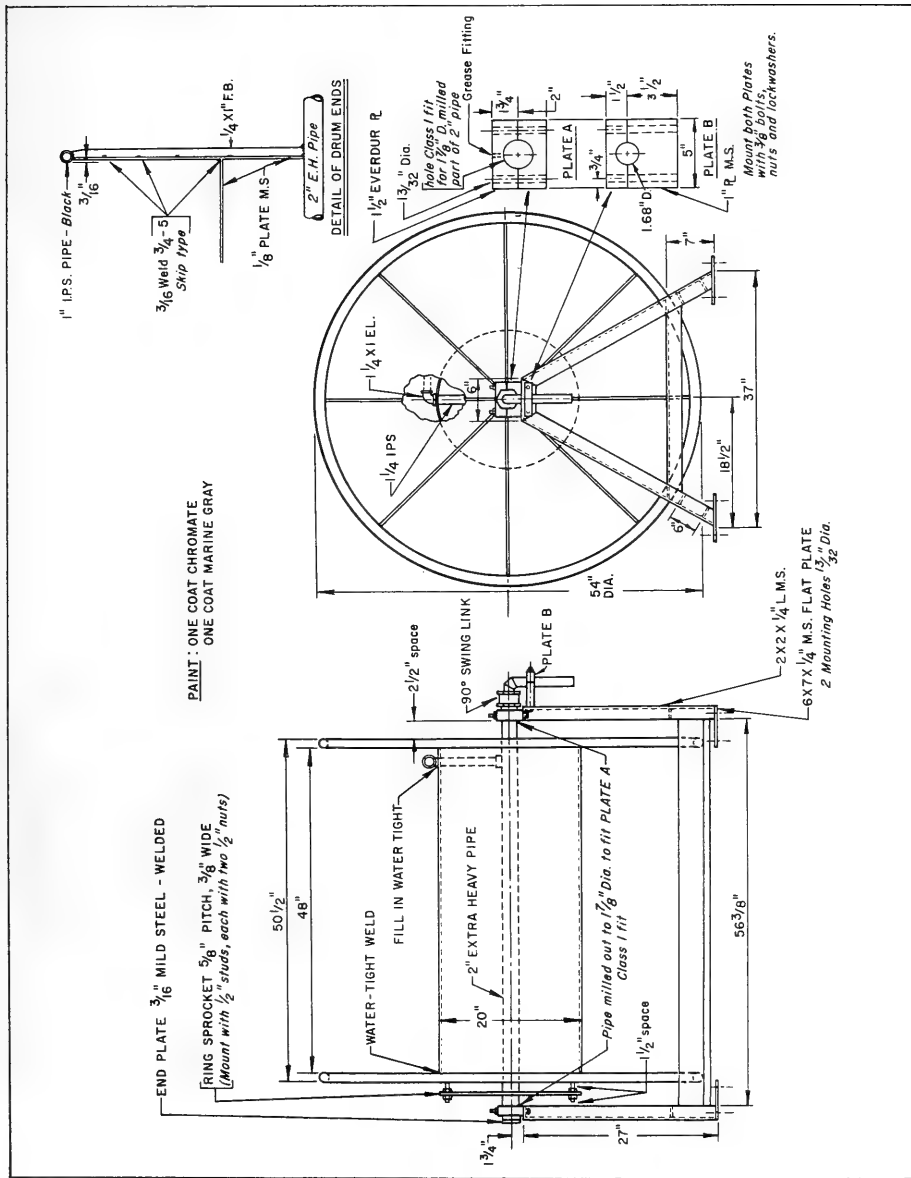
Drawing of plastic pipe reel for handling 400 fathoms of air-curtain equipment.
